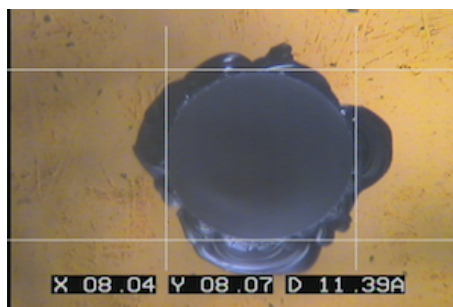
Photograph of drilled mirror hole for the bespoke Herriott cell. The cursors are indicating a finished hole size of approximately 0.8 mm.
